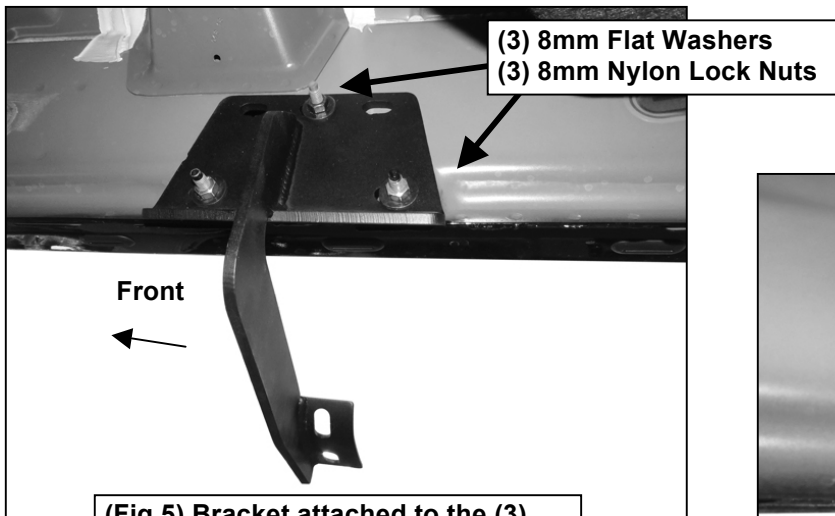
Bracket attached to the (3) front studs on the passenger side
